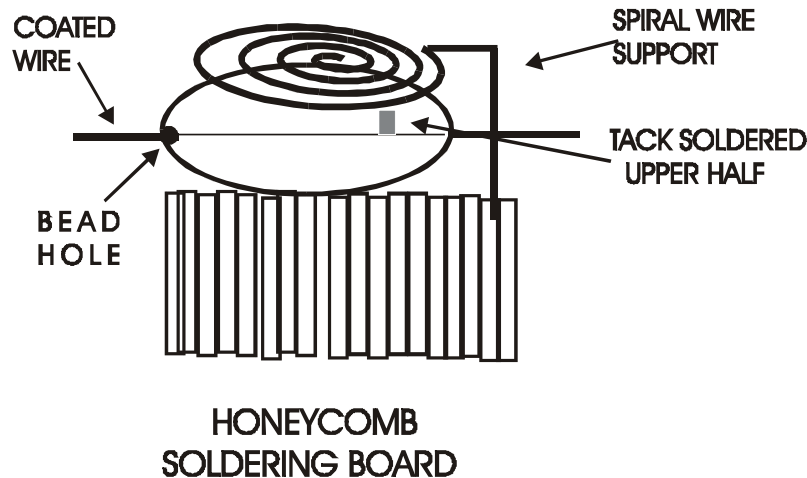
Soldering Arrangement for the Tilted Bead. The domes are placed on the honeycomb block with the tack-soldered dome on top. A “white-out” coated wire is placed through the drilled bead holes. A reusable spiral wire is capped over the domes to hold them in place for soldering. The torch is directed to the lower dome so that the increased heat and gravity pull the tack solder down to the seam line.
